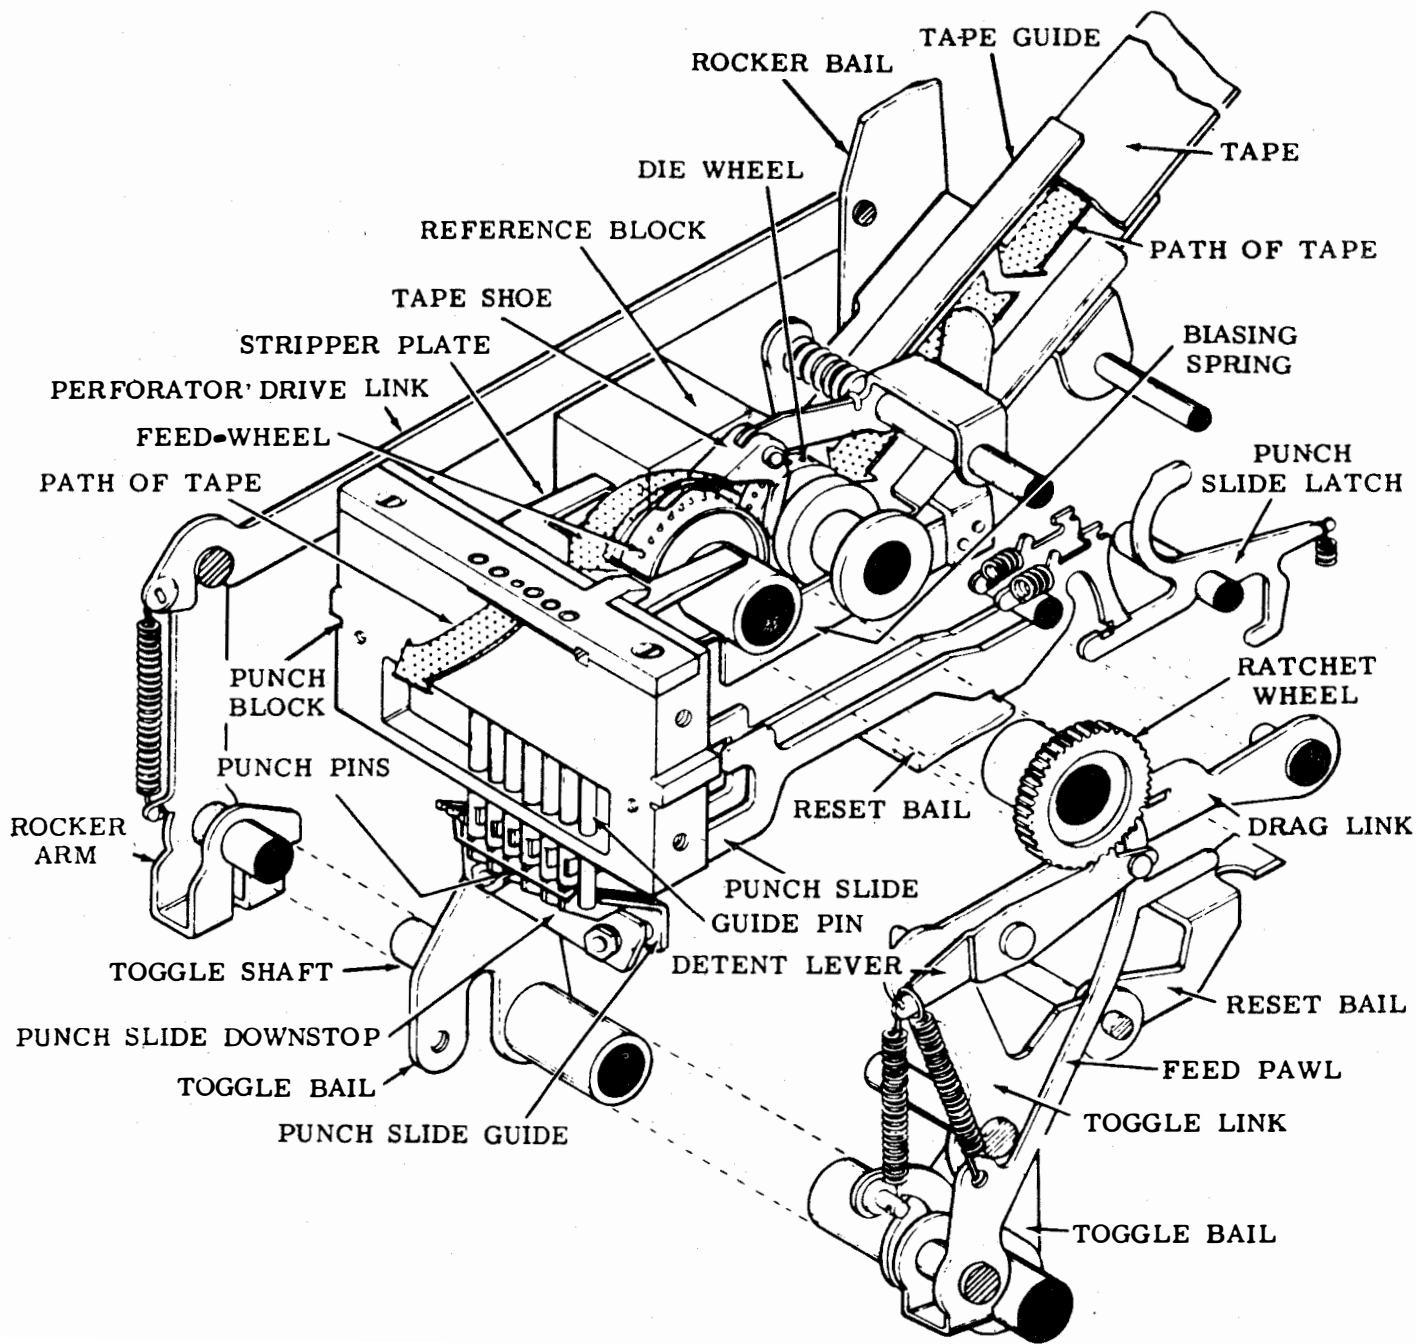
Perforating Mechanism - Fully Perforated Unit
